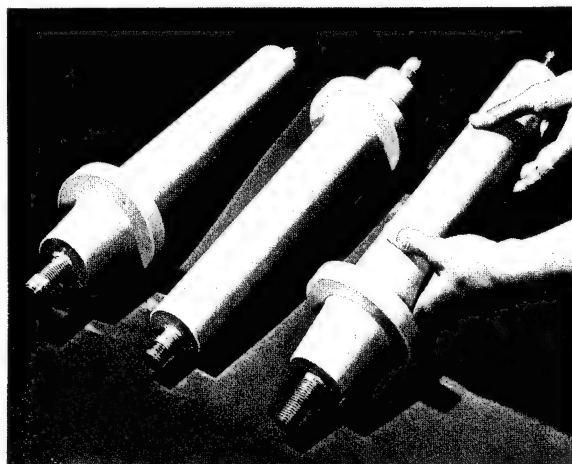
11 KV bushings moulded by Mawson Taylor Ltd.
